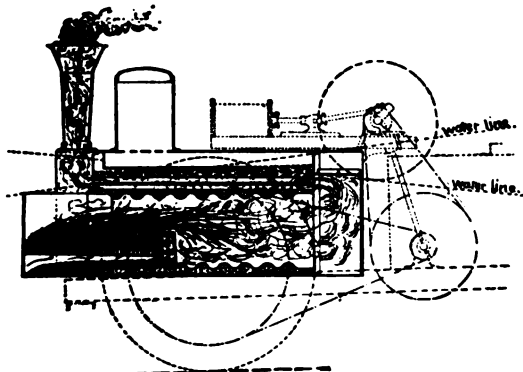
A traction engine boiler showing the engine in place and arrangement of gearing.
